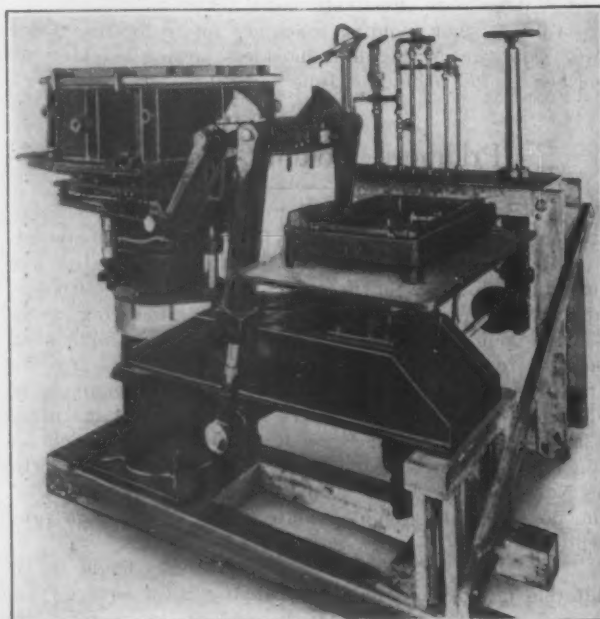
The Combination Jarring and Roll-Over Molding Machine Made by the Tabor Mfg. Company, Philadelphia, Pa.
